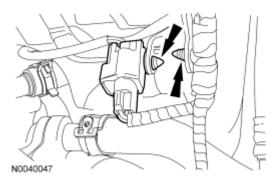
Locating Coolant Hose Courtesy of FORD MOTOR CO.
